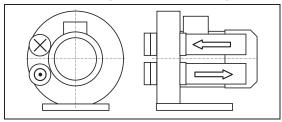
2BH721 ... 2BH761 (single-impeller pumpmotor units)
